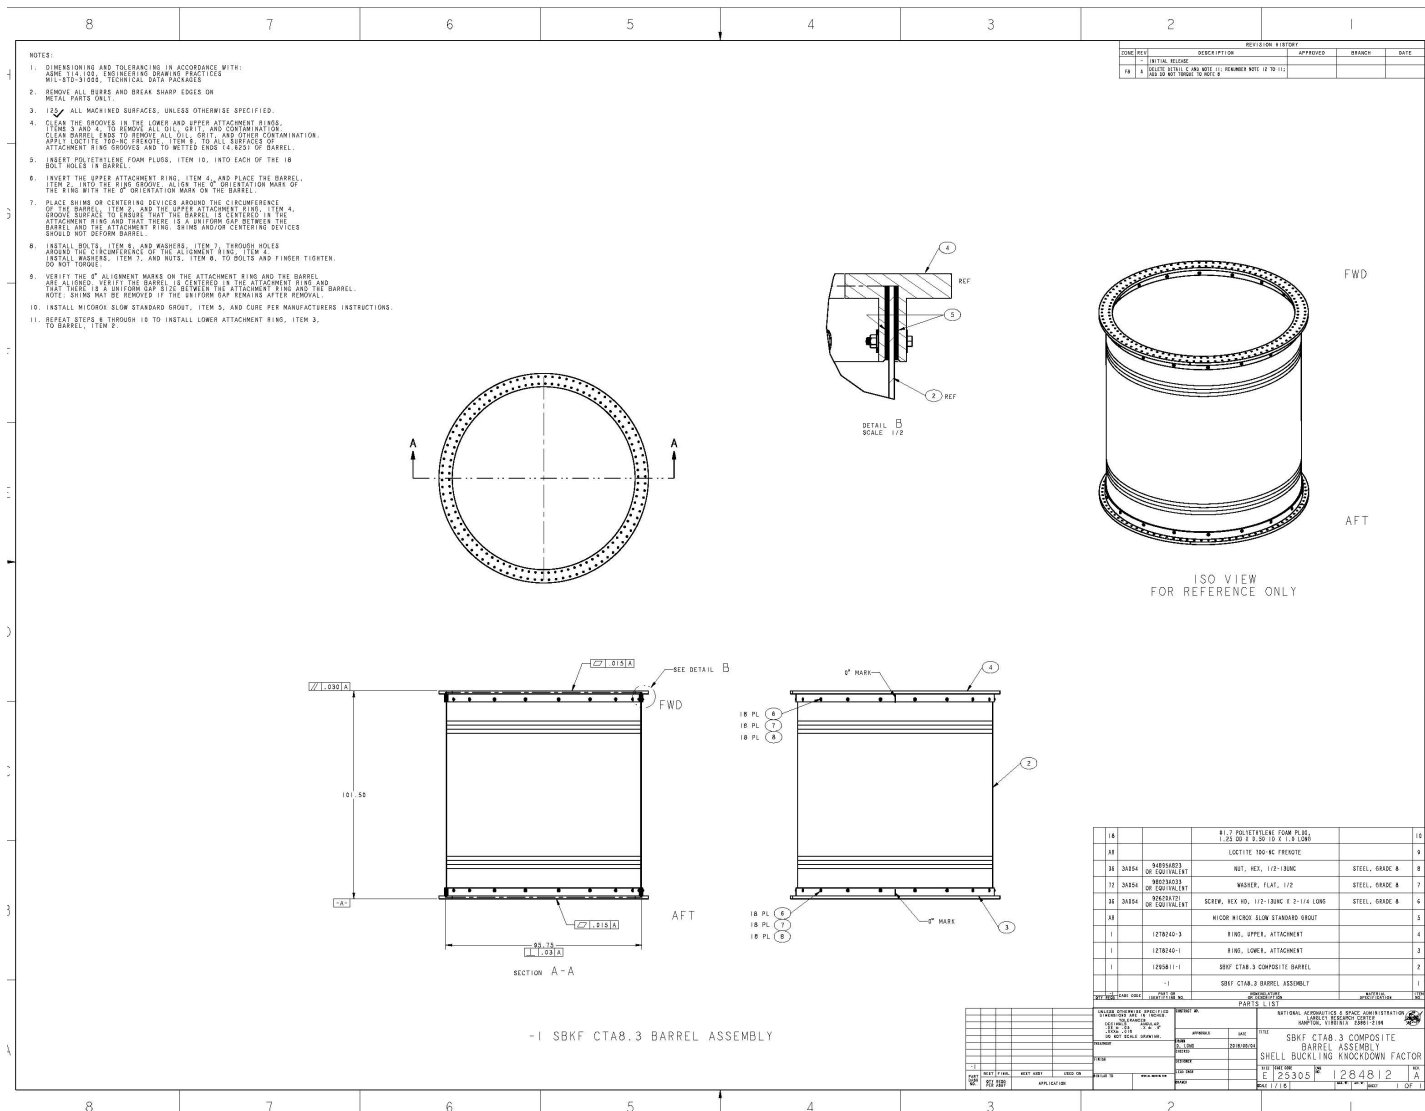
CTA8.3 assembly drawing, LaRC Drawing 1284812 Rev. E.
